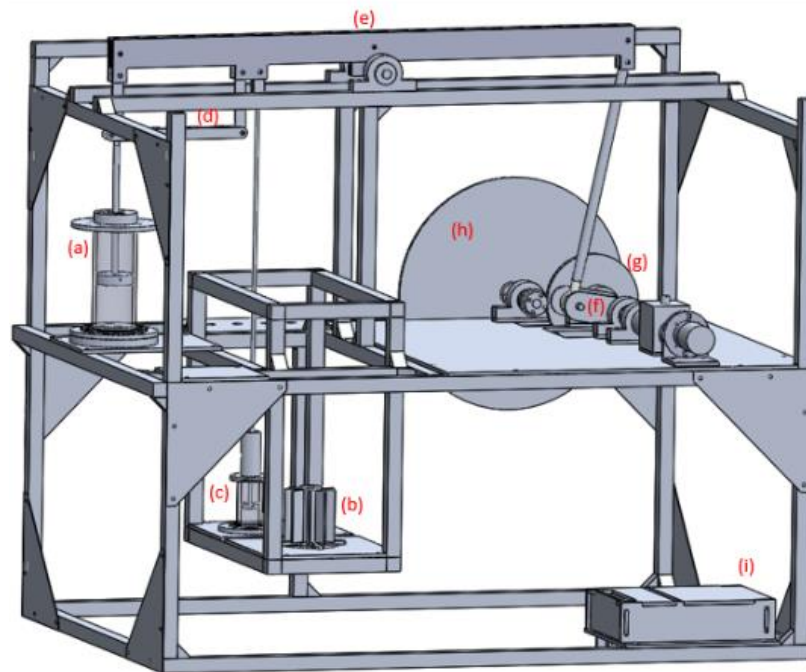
MK.II atmospheric condensing engine schematic and design CAD. (a) = cylinder. (b) = condenser. (c) = pump. (d) = parallelogram. (e) = beam. (f) = crankshaft. (g) = gearing. (h) = flywheel). (i) = electronics and control. Credit: (Ho Chan, et al., 2017)
